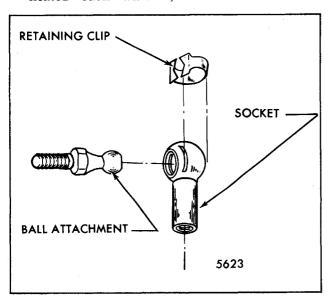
Support Assembly Retaining Clip - H-07, 77 and X-17 styles
